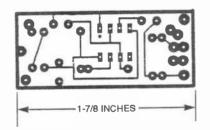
If you'd like to etch your own PC board for the Control module, use this full-size template.
